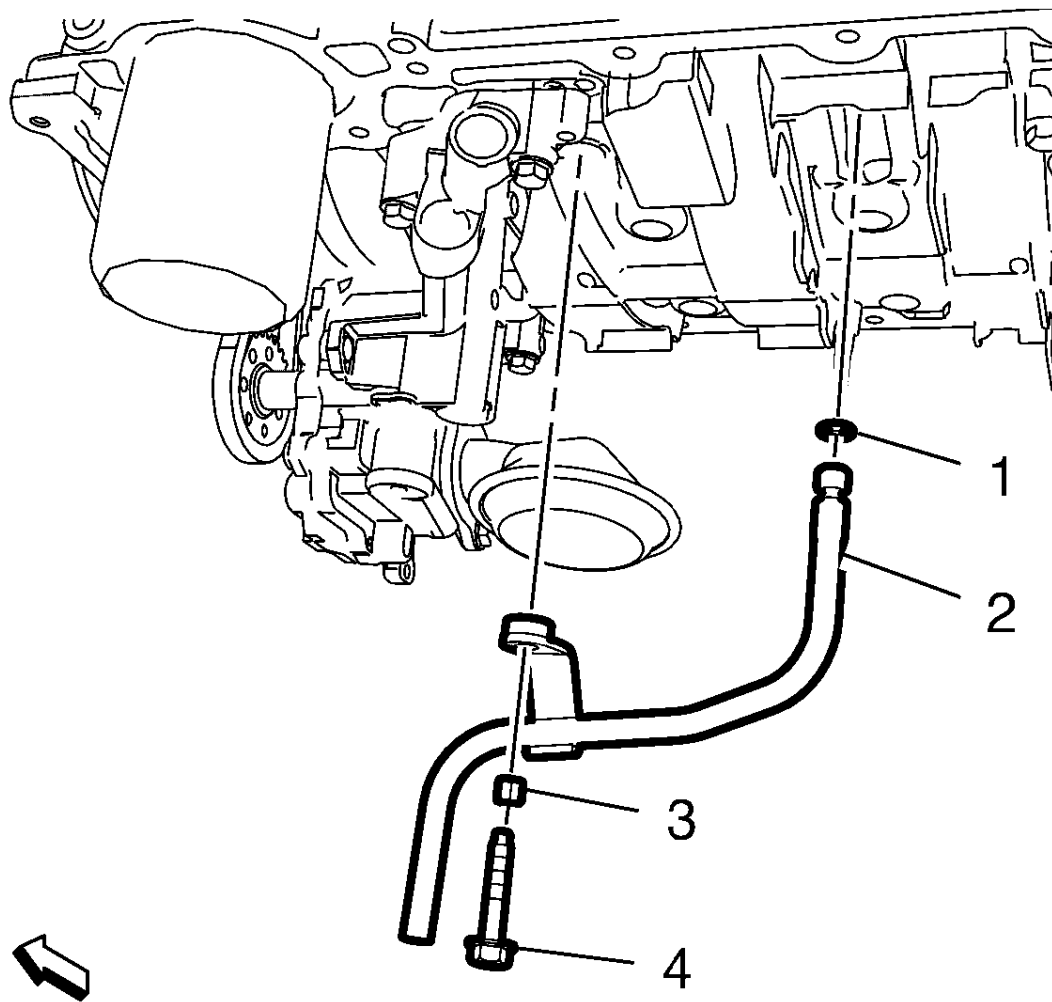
Positive Crankcase Ventilation Oil Separator Drain Pipe, Bolt And Seal
